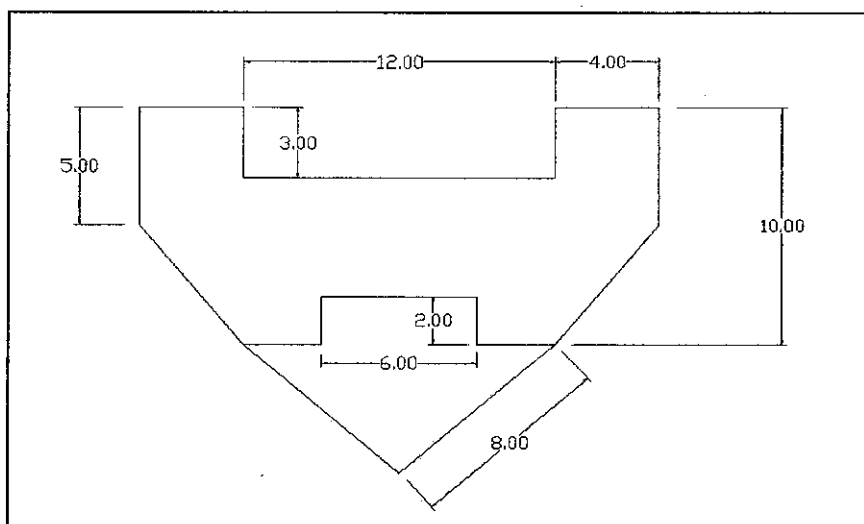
Cross sectional view of the GEN-2 model with keel plates
